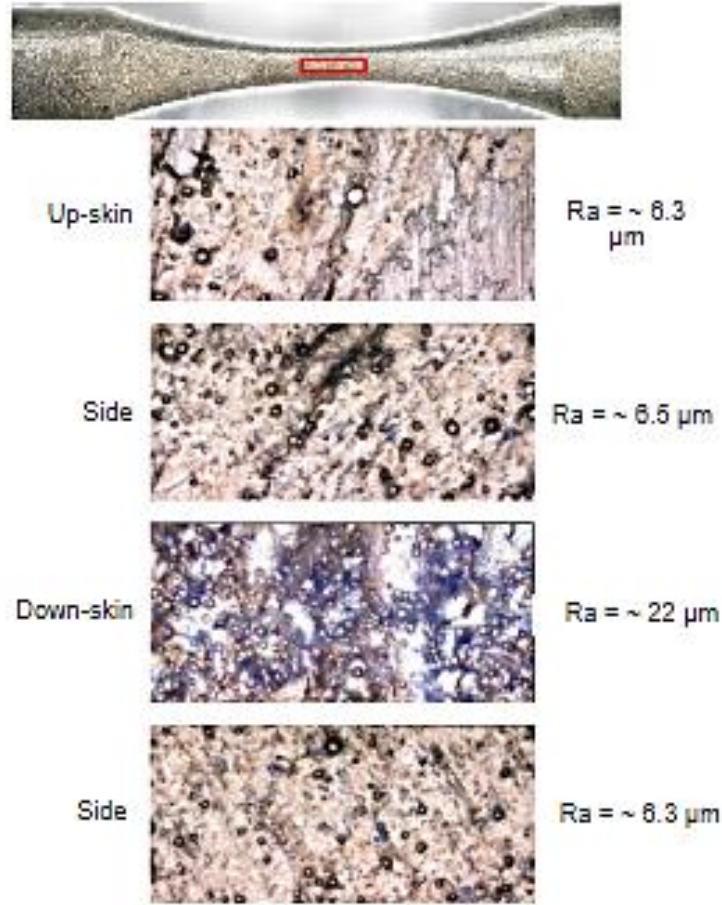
Surface roughness, Ra, measurements of four sides of an as-built D Inconel 718 specimen gauge section.
